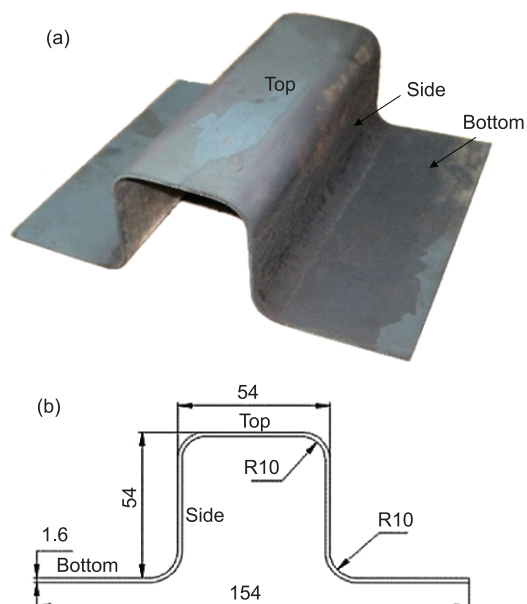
(Color online) Experimental part. (a) The produced part; (b) a dimensional drawing of the part.
